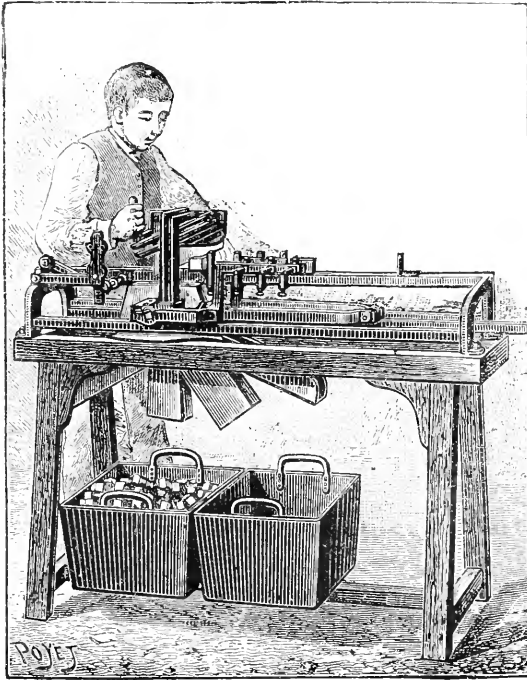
CORK-SQUARE CUTTING-MACHINE.
